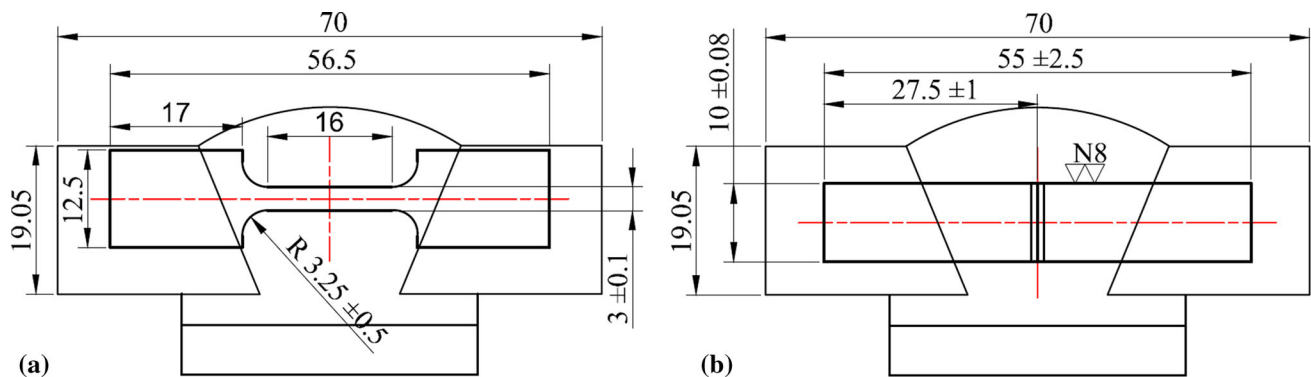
(a) Transversal tensile specimen location. Dimension in mm. (b) Charpy-V specimen location. Dimension in mm
